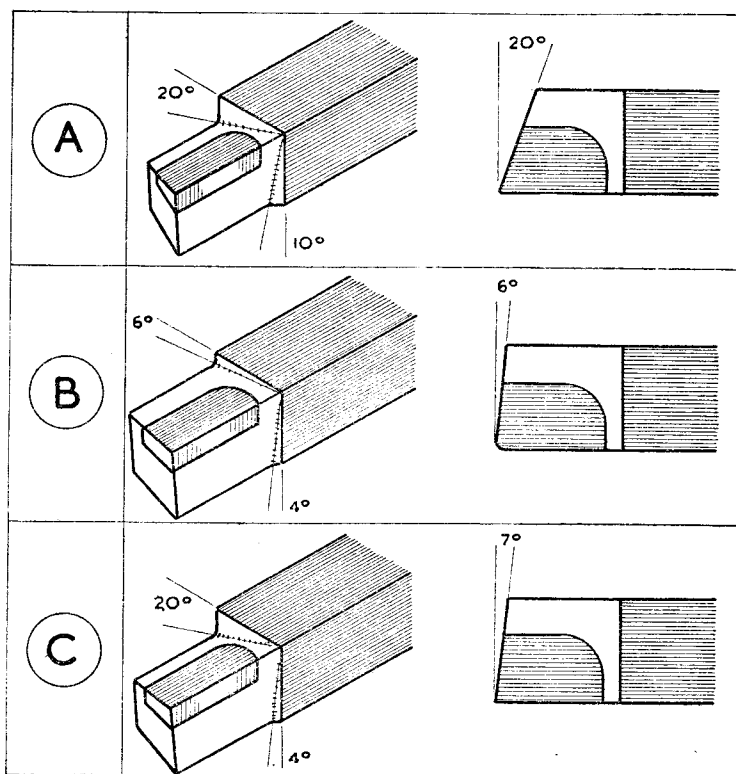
A—the original Widia tool; B—Grade A Mitia tool for machining cast-iron; C—Grade B Mitia tool for use on steel
